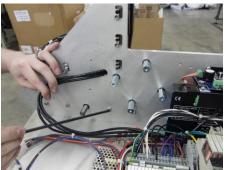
Remove bottom 4 screws on the left panel to release the carriage.
